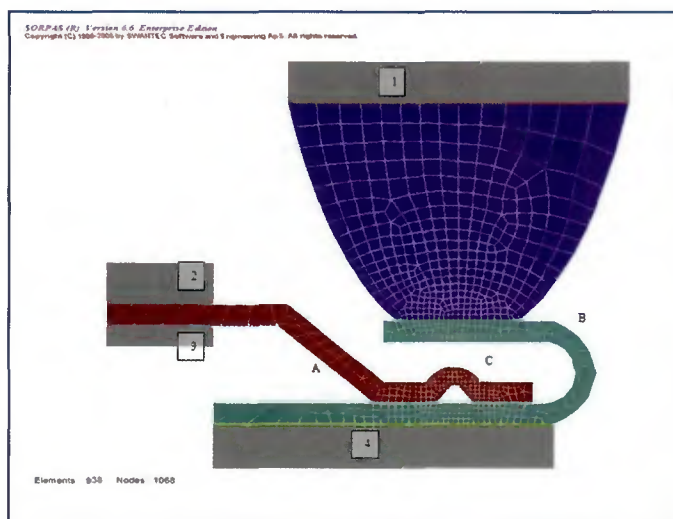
An indirect hem projection weld. Objects 1-4 are machine tools; A, B, and C are workpieces — the hem-inner, hem-outer, and hem-projection, respectively.
